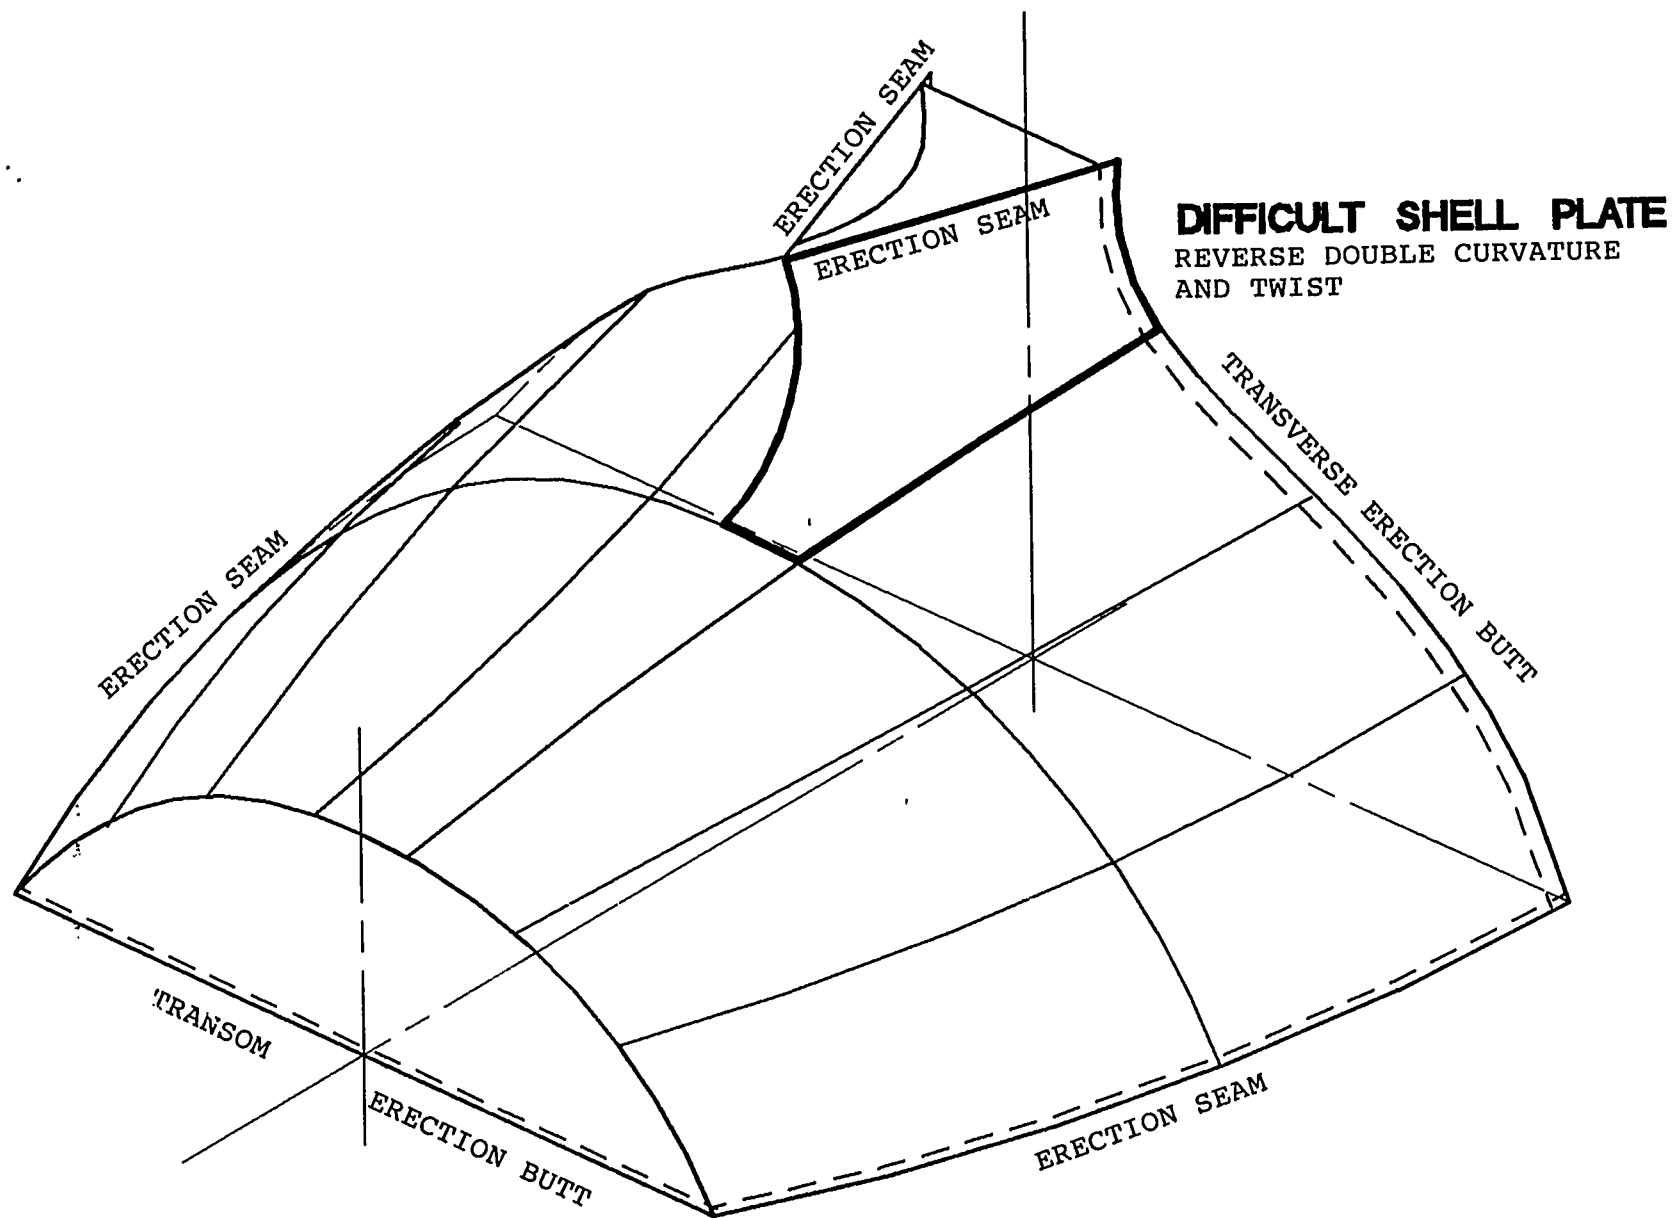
ISOMETRIC VIEW OF BLOCK 110-64
